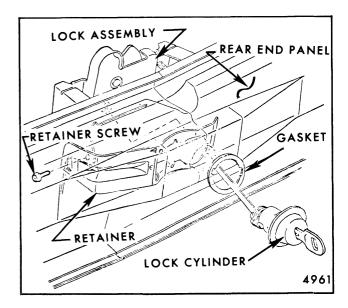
Side Loading Lock Cylinder Retainer - Chevrolet "A-57" Style
